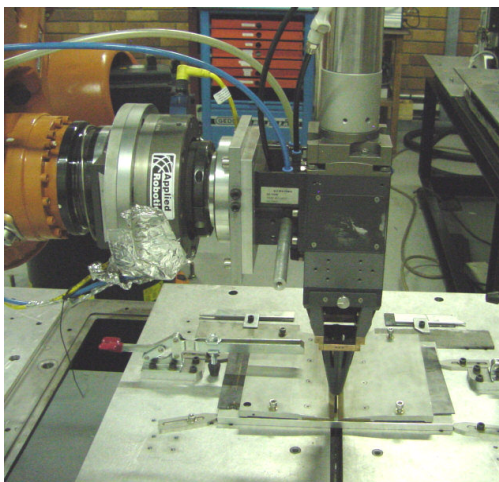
Example of experimental set-up for S/S-Al and S/S-Ti64 dissimilar lap welding
